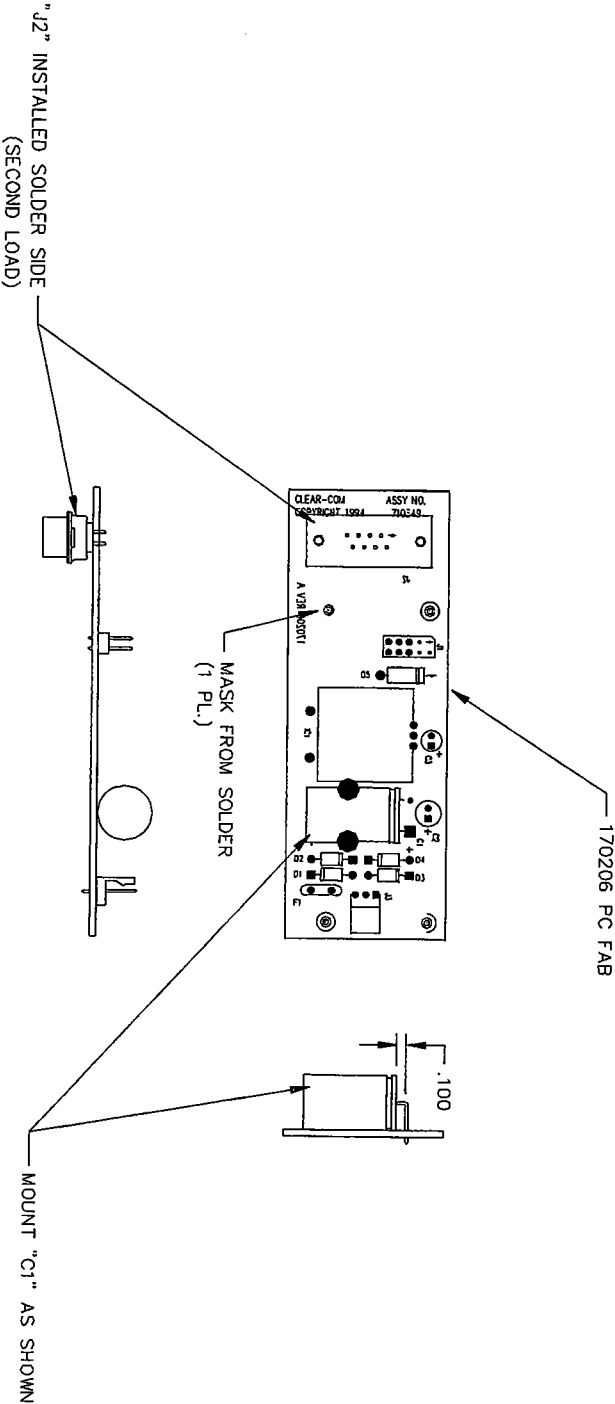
Assembly Drawing—XPL-12 (10-Selector Panel w/ Electronic Labels) Rev. B
